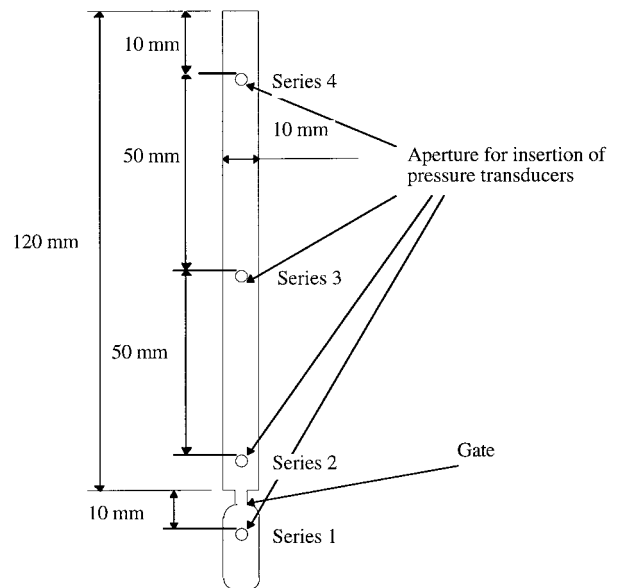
Sketch showing the pressure transducer positions in the test mold cavity used in this experimental work.
